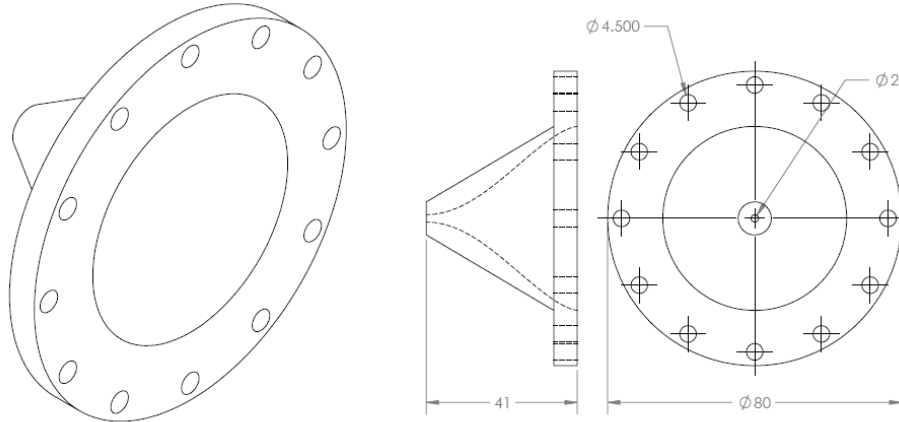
CAD drawing of a converging nozzle with a 2 mm diameter
